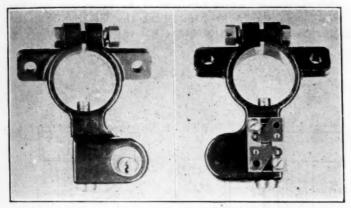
Two Other Views of the Lock Shown in Fig. 27 At the Left Is a Top View of the Lock in the Locked Position and, at the Right, a Bottom View Showing the Switch with the Switch-Housing Removed
